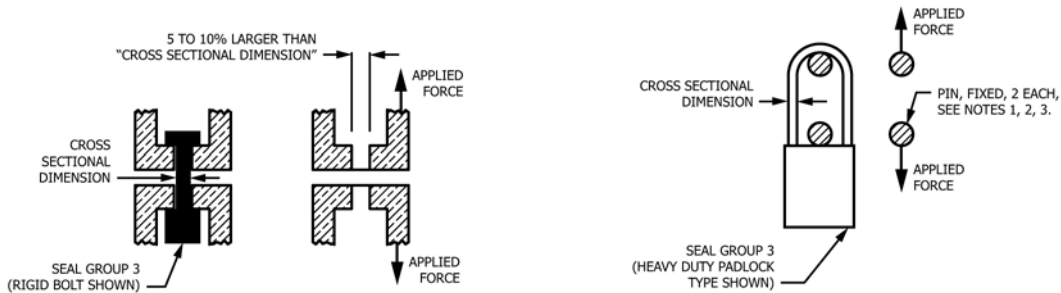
Schematic Drawings of Pull (Tensile) Test Fixture Requirements for Group 3
